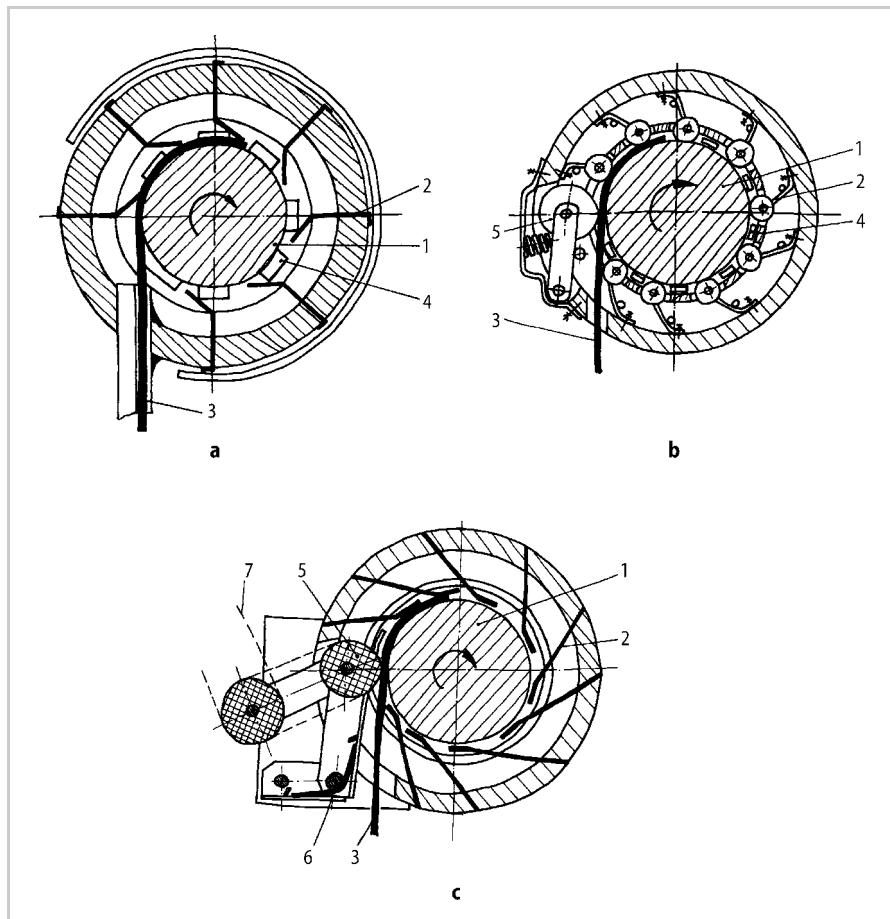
a Proposed winding device: 1 rotating mandrel, 2 pressure springs, 3 strip to be wound, 4 parts of the ejection mechanism; b proposed winding device: 1 rotating mandrel, 2 springs with pressure rollers, 3 strip to be wound, 4 parts of the ejection mechanism, 5 feed-in roller loaded by spring and possibly driven; c Chosen solution: 1 rotating mandrel, 2 pressure springs, 3 strip to be wound, 5 feed-in roller tensioned by spring 6 and driven by belt 7
